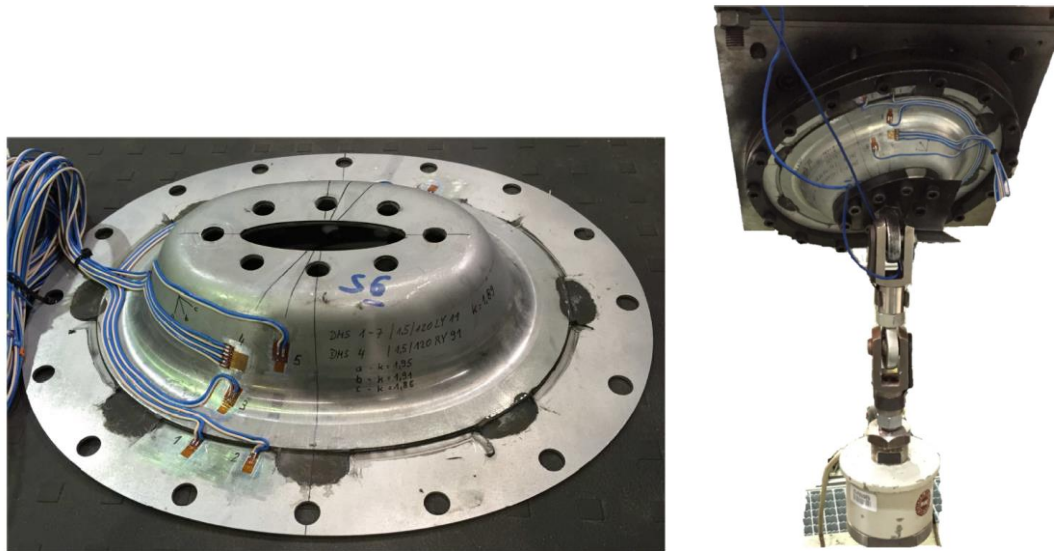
Cup-shaped specimen (left), Possible setting up of Cup-shaped specimen (right)
